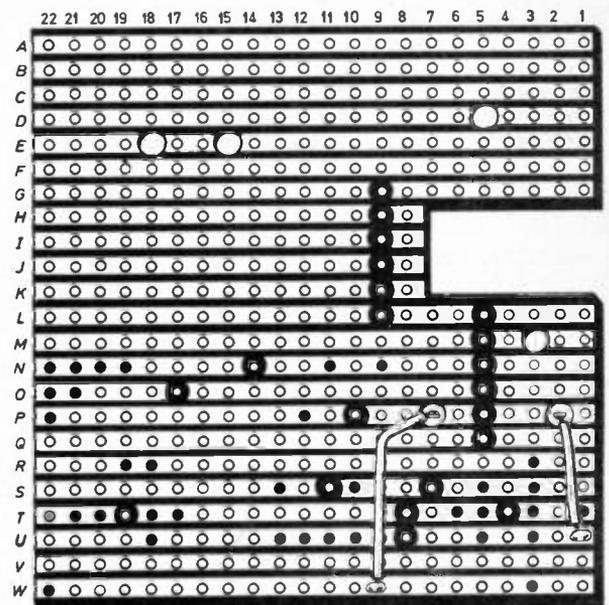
Complete wiring details for the unit, also showing the stripboard and breaks to be made.
